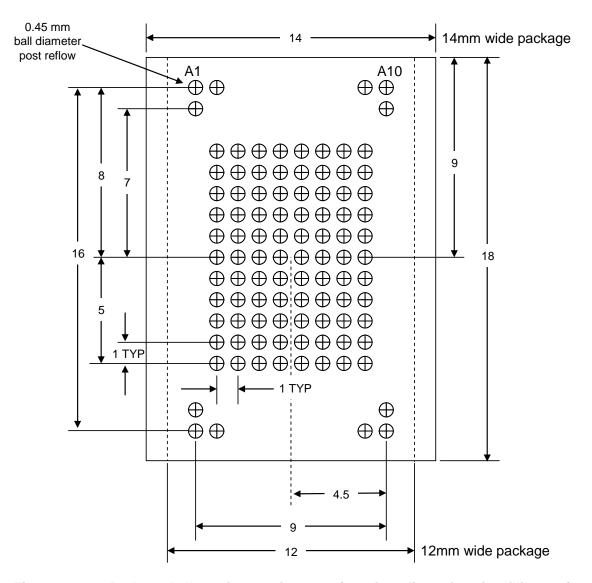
BGA-100 ball spacing requirements (top view, dimensions in millimeters)
